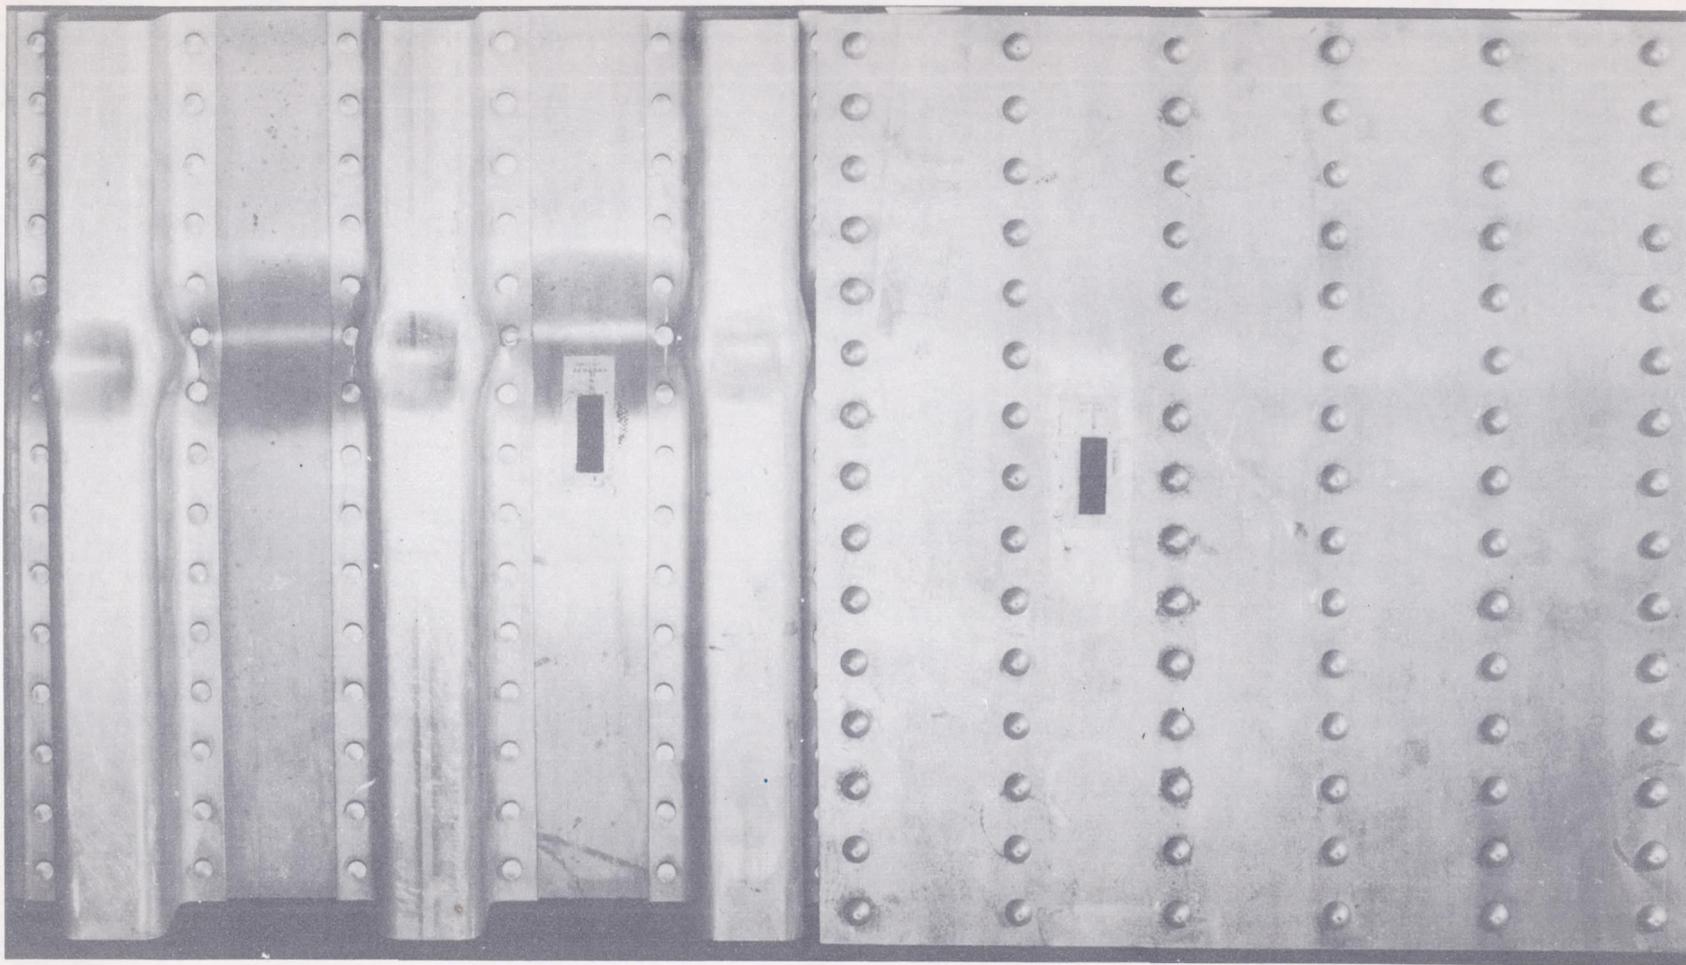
Typical specimens with 0.156-in. gage sheet after testing. The specimen on the left was loaded until failure of the rivets and stiffeners occurred.
